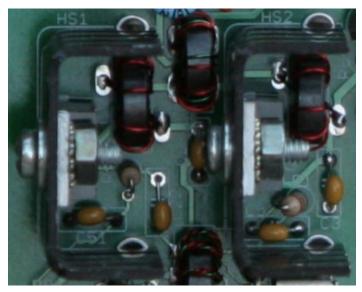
The heat sinks of the IRF510s are press mounted flush with the top of the PC board
